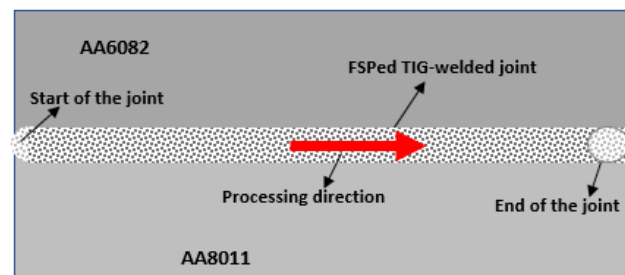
Schematic diagram of the friction stir processed TIG-welded plate.
